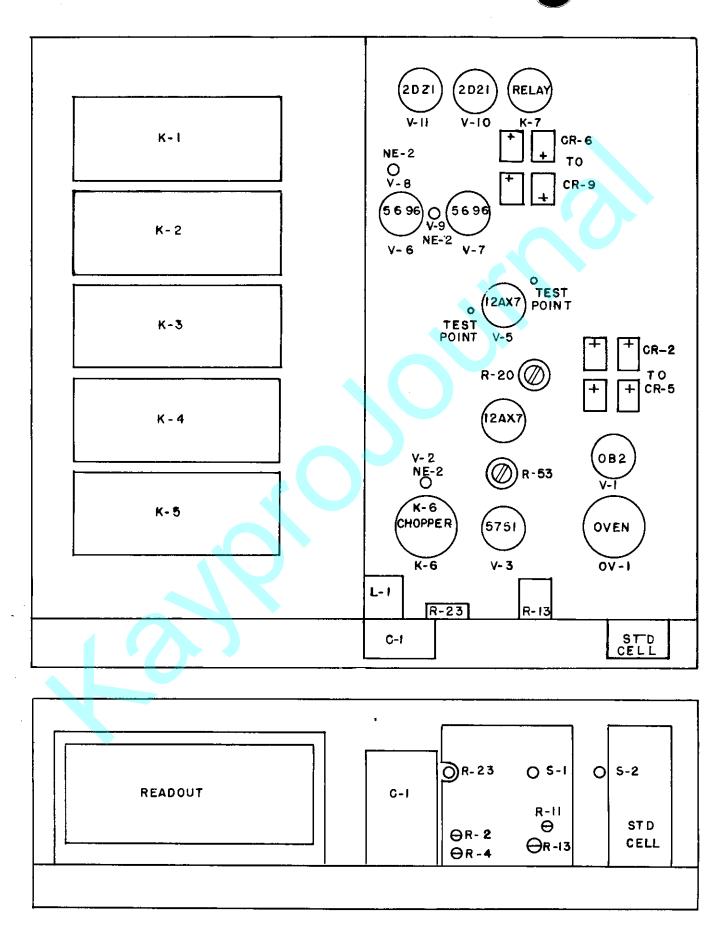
COMPONENT LOCATION FRONT PANEL AND CHASSIS
